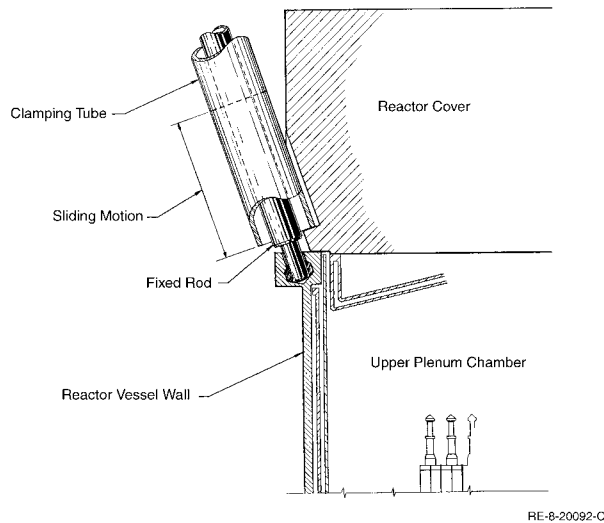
REACTOR VESSEL ASSEMBLY.
